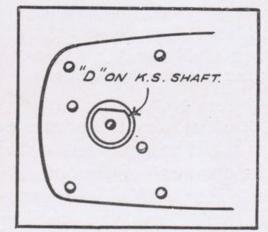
SHOWING THE FLAT ON THE KICK-STARTER SHAFT.
